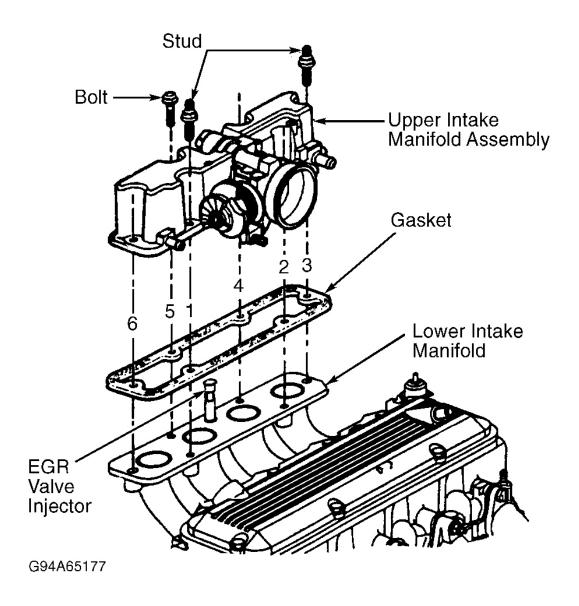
Upper Intake Manifold Nut Tightening Sequence Courtesy of GENERAL MOTORS CORP.
